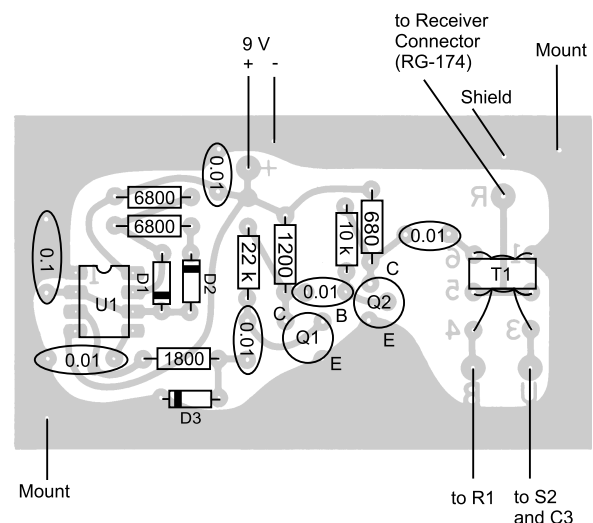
Parts-placement guide for the noise bridge as viewed from the component or top side of the board. Mounting holes are located in two corners of the board, as shown.
